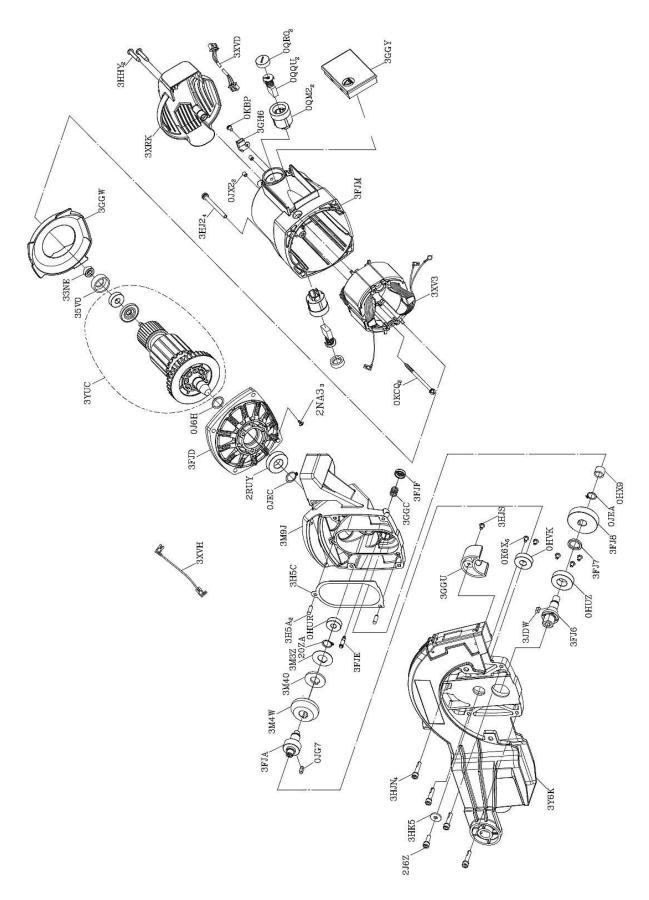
Spare parts drawing 2 KGZ 2540 VARIO
